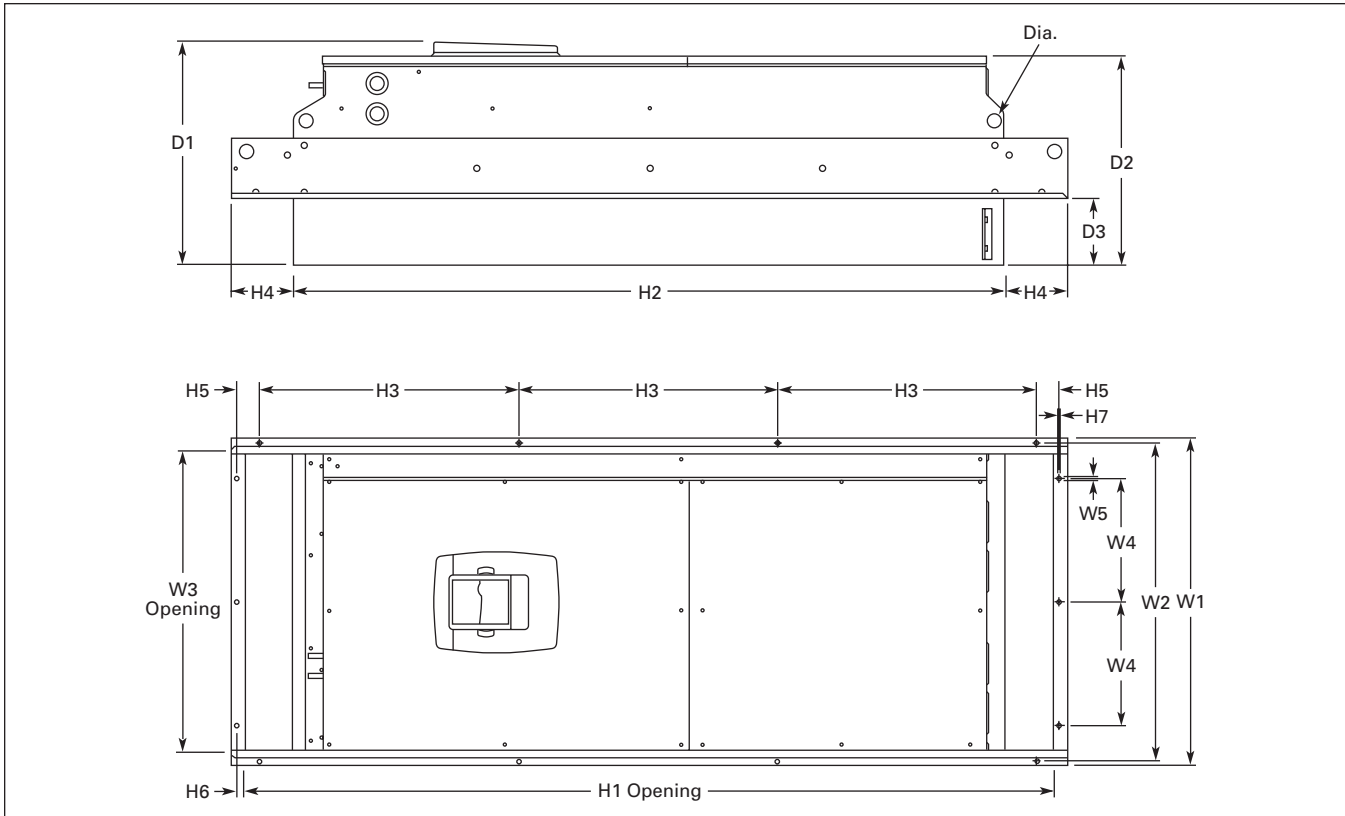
FR9 with Flange Kit Enclosure Dimensions
